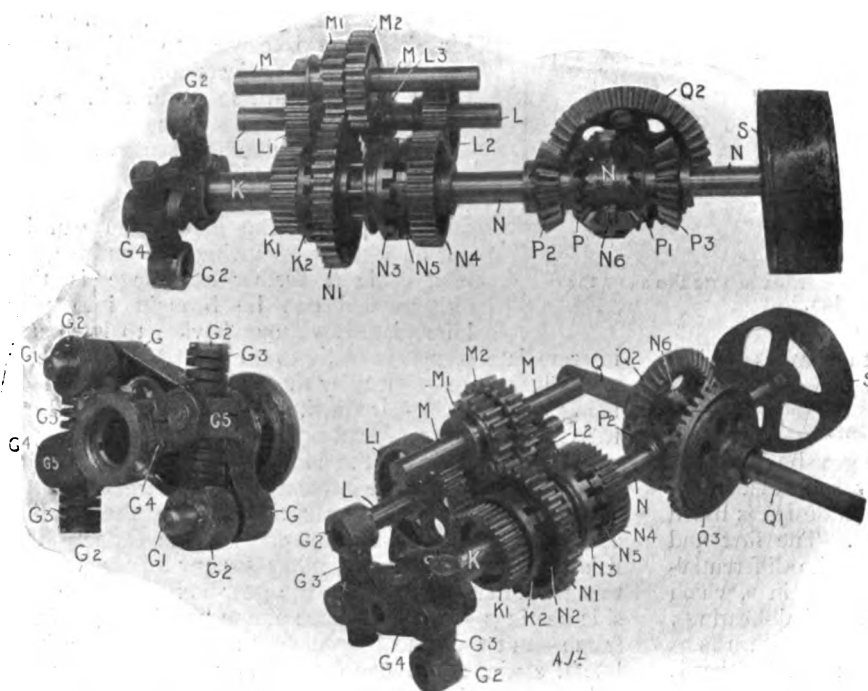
Two views of the Albion Change-Speed-Gear and Differential, removed from the gear-box. Also, on the left, a larger view of the Spring Drive, which is shown in position in the other two views of the gear.
